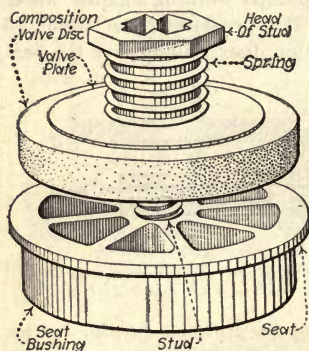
Type Of Pump Valve Used For Clear Liquids.
